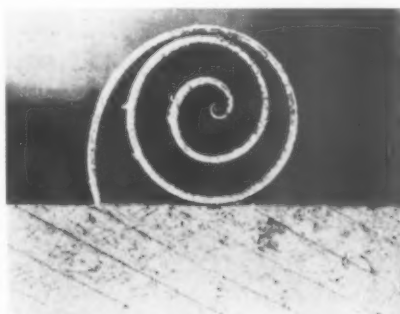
Thickness of material cut directly affects diameter of chip spiral.
